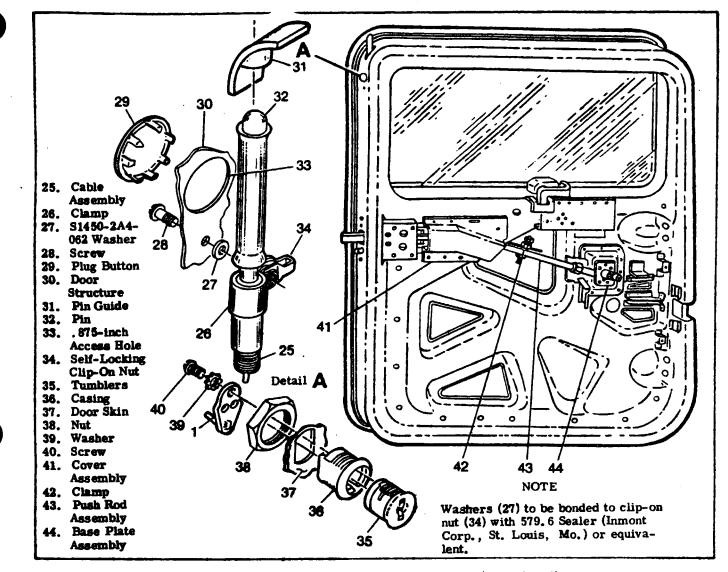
A. Cabin Door and Latch Assembly (Sheet 2 of 3)
